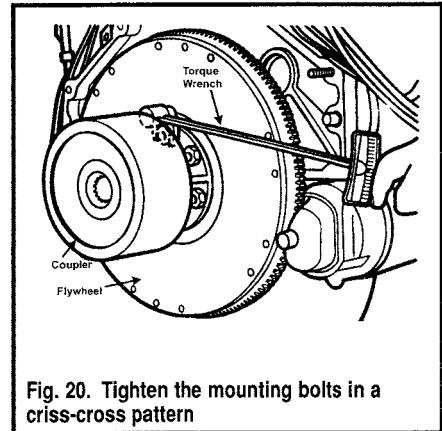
Tighten the mounting bolts in a criss-cross pattern
